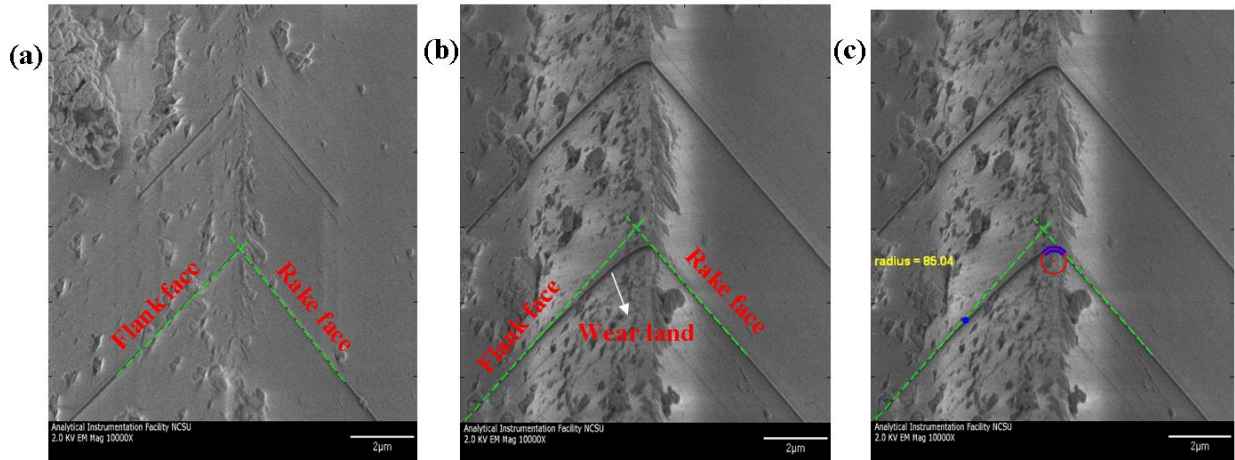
Matlab program fitting process for a worn tool cutting 6061 Al.
